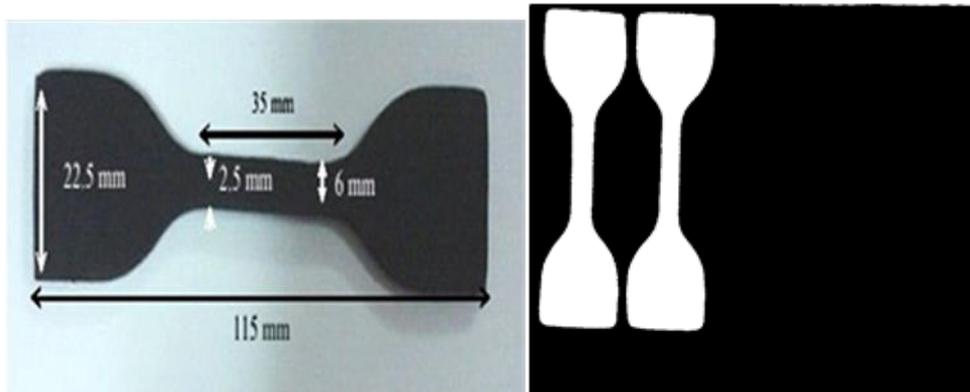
a) Dumbbell specimen b) Slice after cutting
